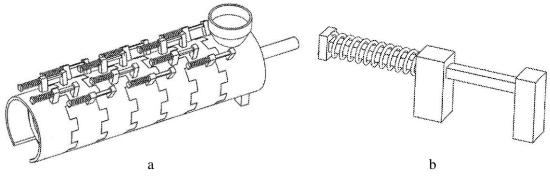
Single-screw press with constant pressing pressure (a) and an element for tightening adjacent sections of the barrel (b) (Patent No. CN113580637A)
